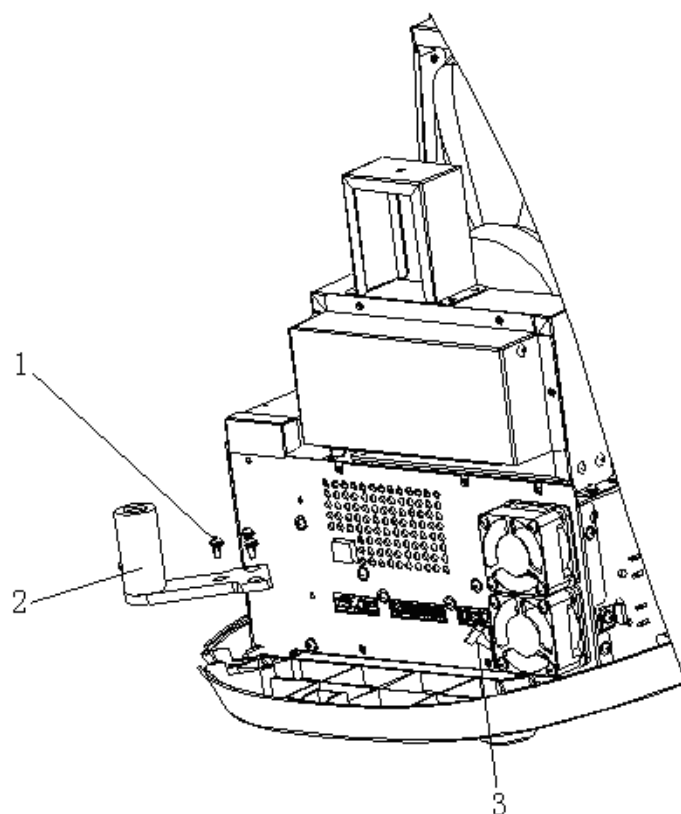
Sketch Map of Back Cover of Main Unit Box Disassembly (1)
